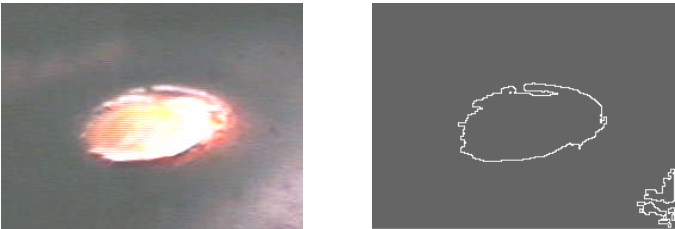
Arc images of laser-TIG hybrid welding processing
